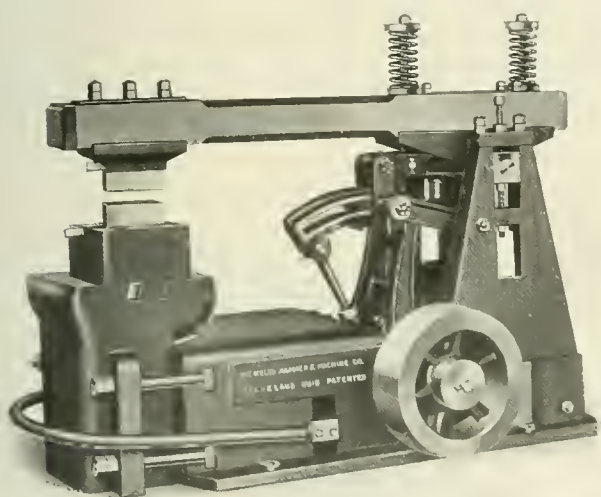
Belt-driven Variable-blow Power Hammer, built by the Welch Hammer & Machine Co.
